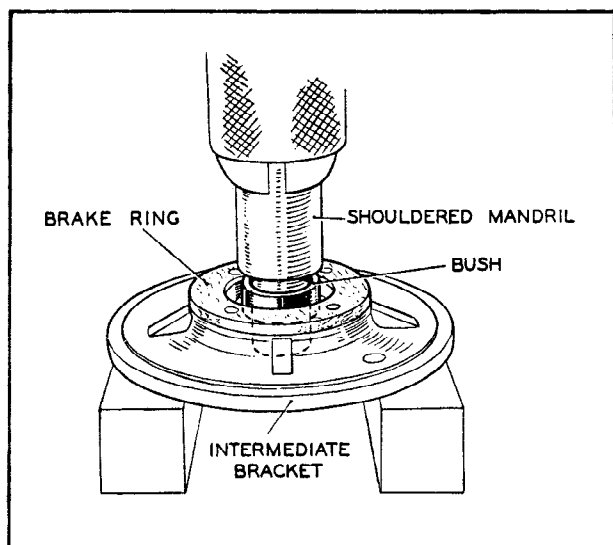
Fitting Bearing Bush to Intermediate Bracket
